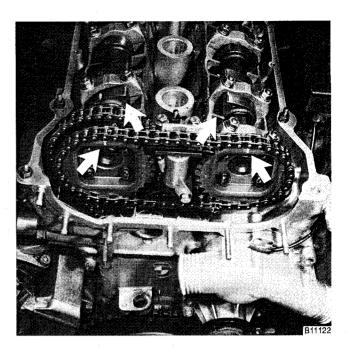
Camshafts positioned at TDC—Cyl. No. 1 cam lobes face in Note 0/T mark (0°TDC) on vibration damper aligned with boss on front cover.
